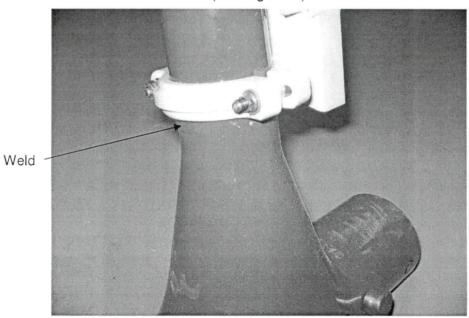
Aft Beam Installation, Bottom Clamp
